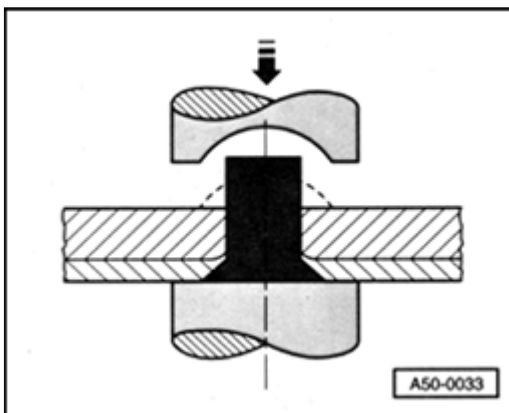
Inserting Solid Rivet And Affixing Closing Head With Rivet Tool
